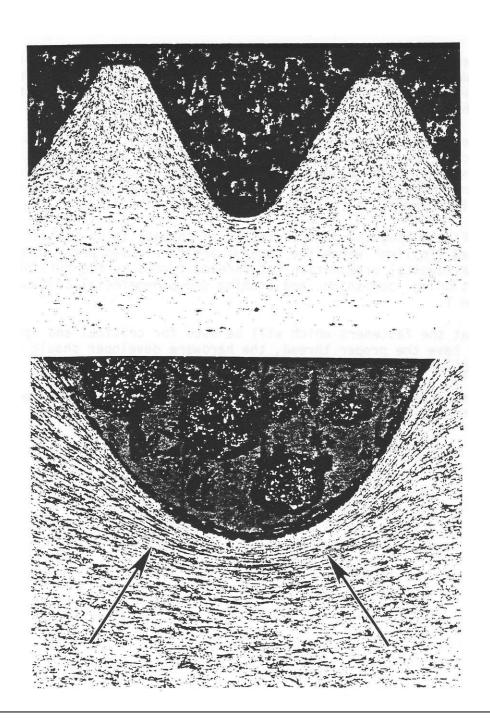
Rolled threads. Arrows indicate compressive zone at thread root. $Top\ photo\ 50X\ --\ Bottom\ photo\ 200X.$
